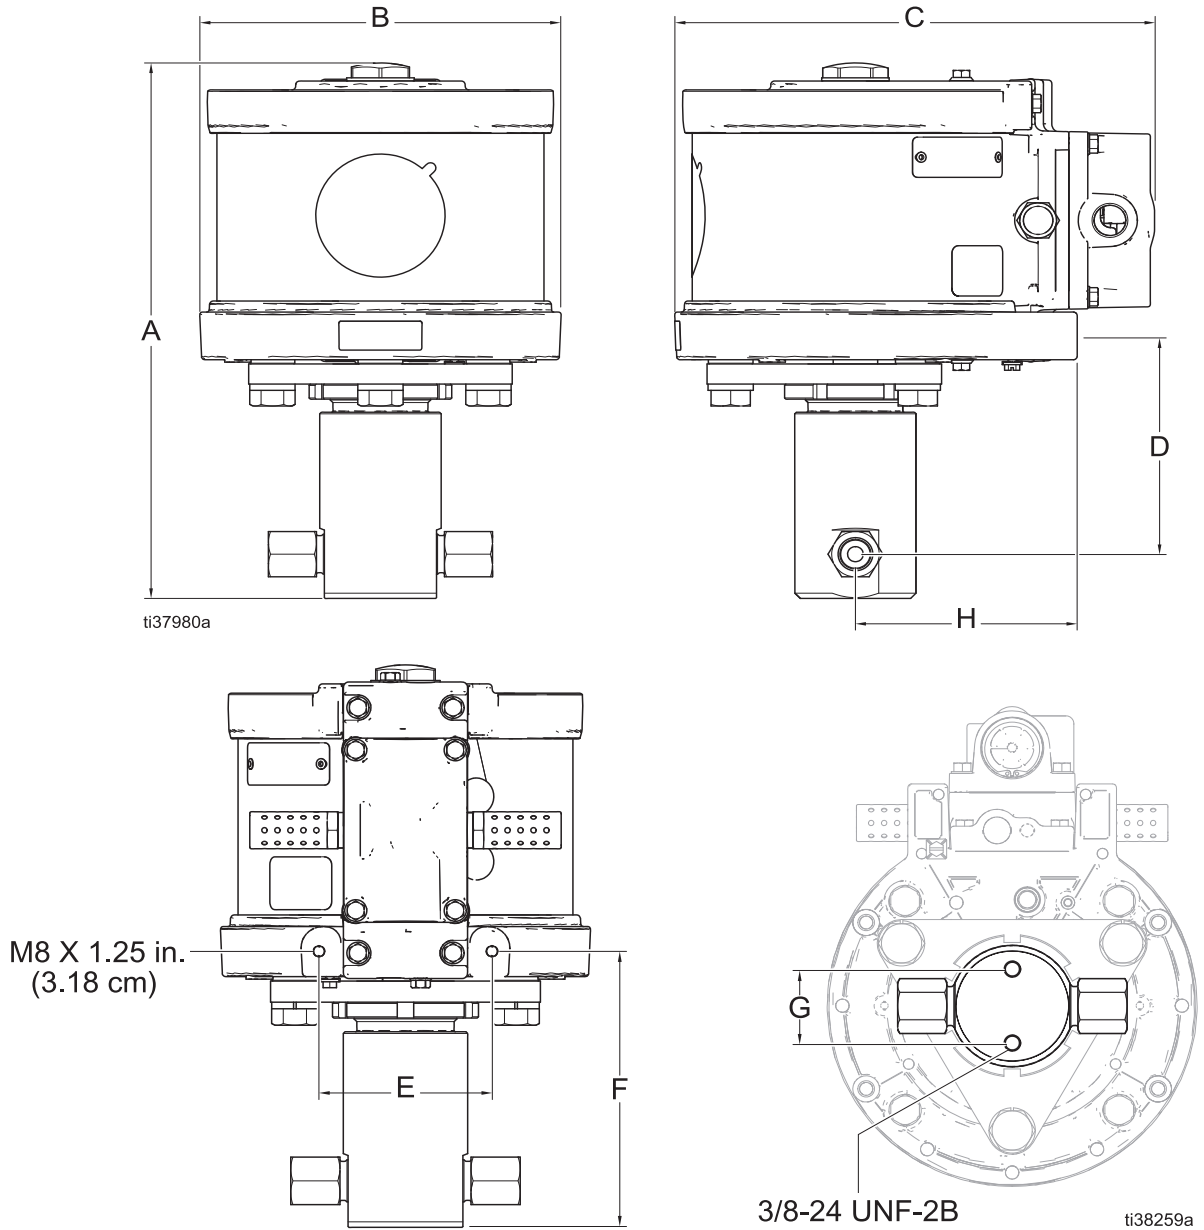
T-Series Pump Dimensions and Mounting Holes
